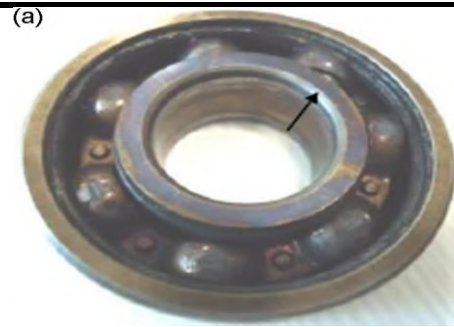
(a): Damage observed on the cage in the as received condition. Fig.6 (b): Separated view of bearings (1) Outer Ring. (2) Ball bearings. (3) Cage or retainer. (4) Raceway. (5) Inner ring.
